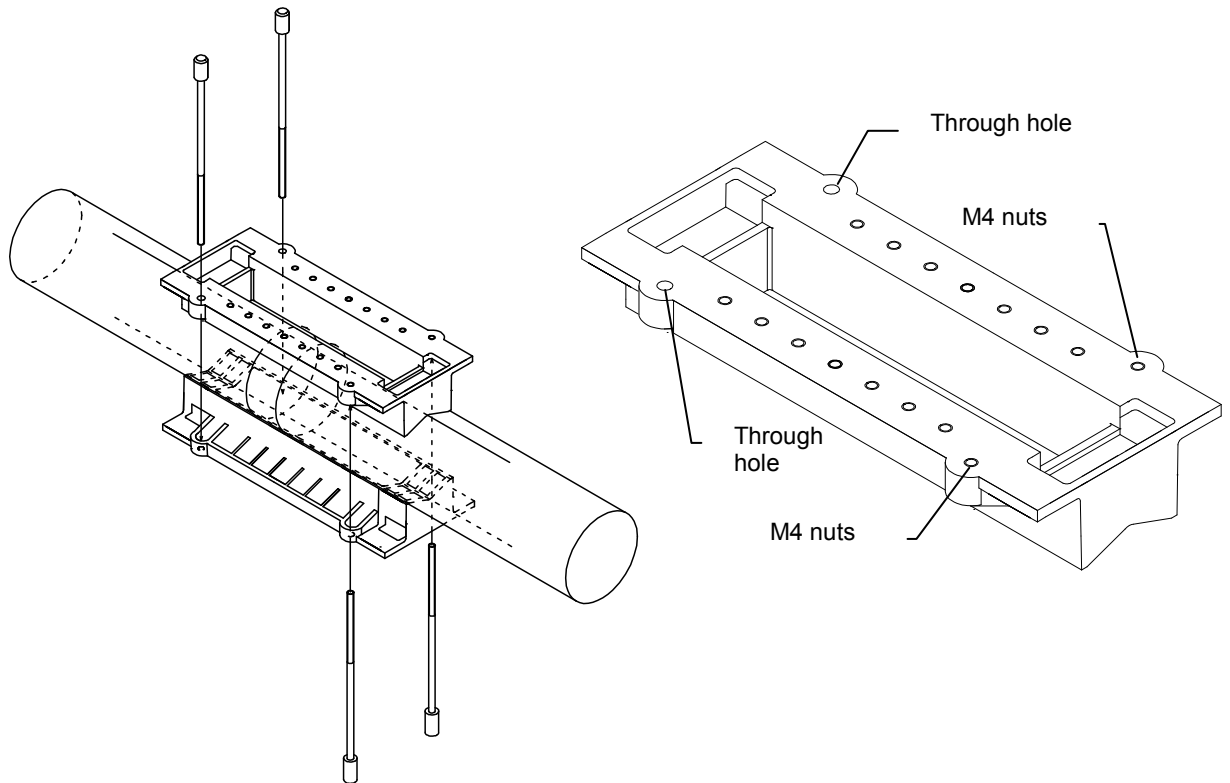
DN50mm or less, Z mounting method (1)
